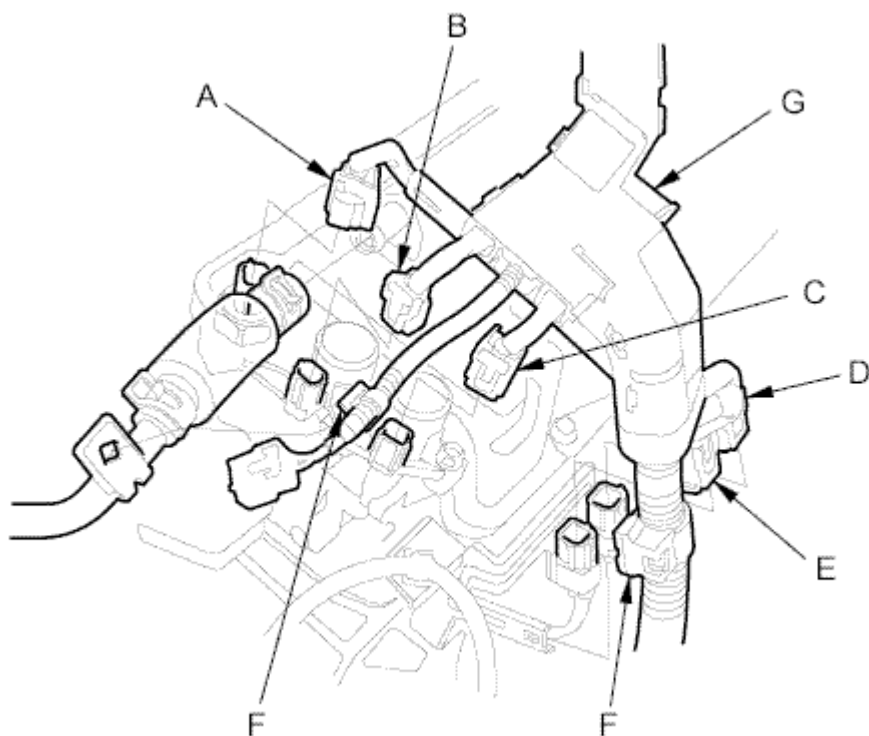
Identifying Rear Cylinder Head Cover And Wiring Harness
